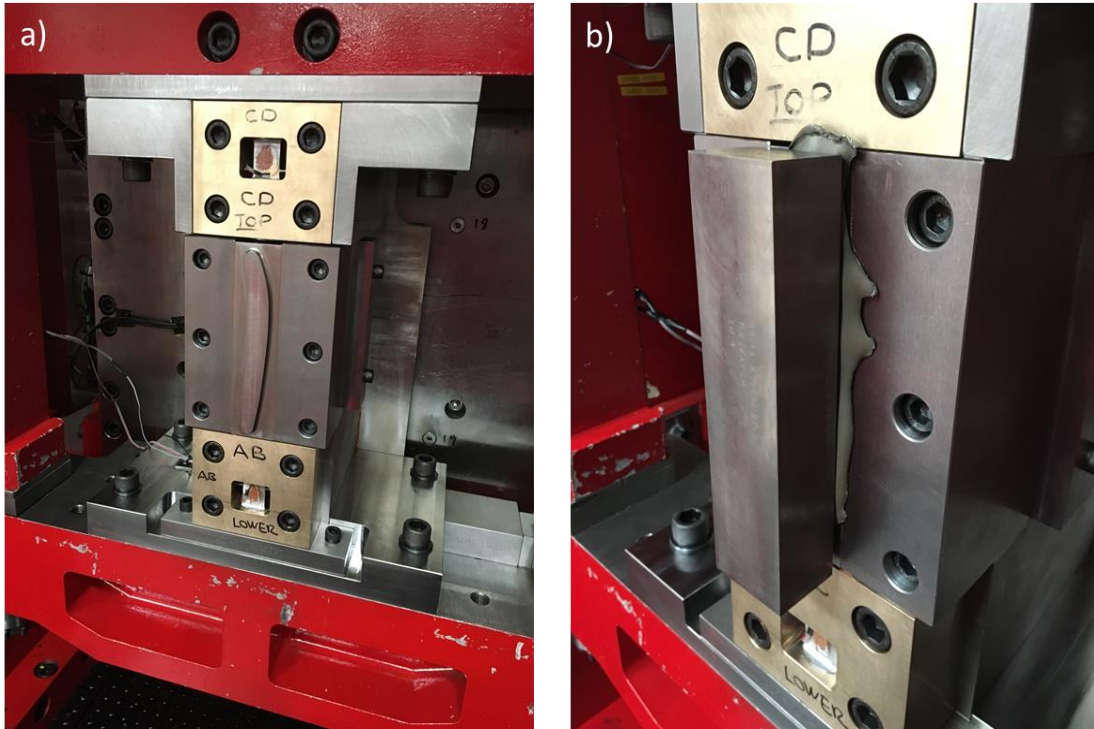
Workpiece inside the tooling of the LFW machine a) before and b) after welding
